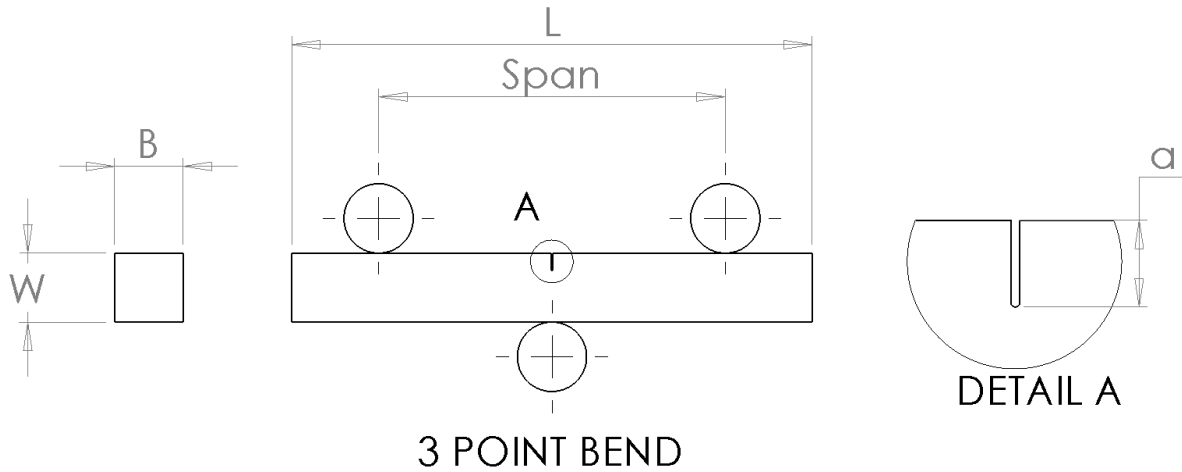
SENB3 sample drawing showing the dimensions of a (crack length), W (sample width) and B sample breadth.
